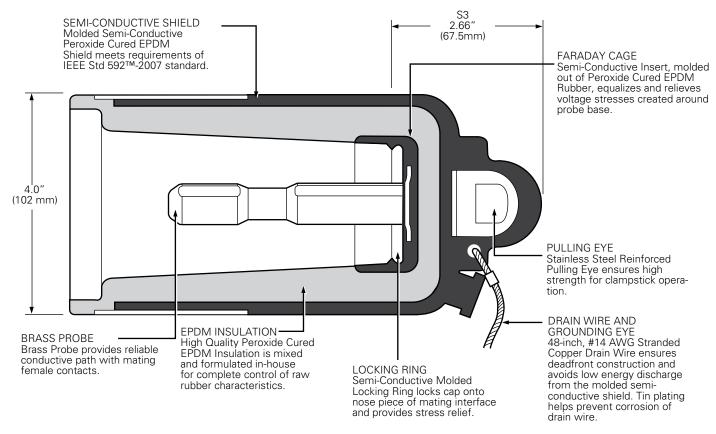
Cutaway drawing shows design integrity and stacking dimensions.
